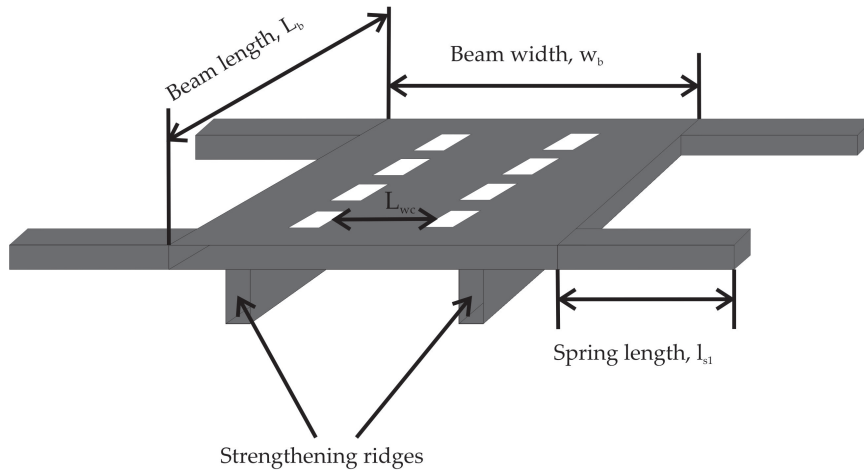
3D drawing of suspended mechanical beam showing the dimensional parameters
